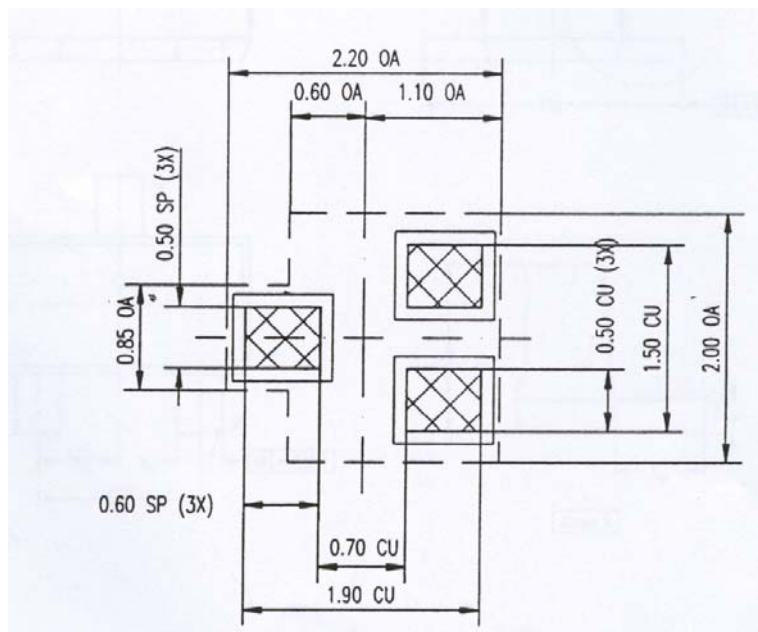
Footprint for SOT490 (SC-89) component (reflow)
